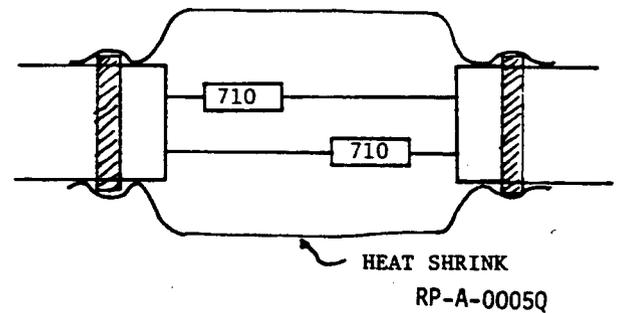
TUBING SHRUNK ONLY OVER THE ENDS (PAR. 5. 3.2.3.F)
